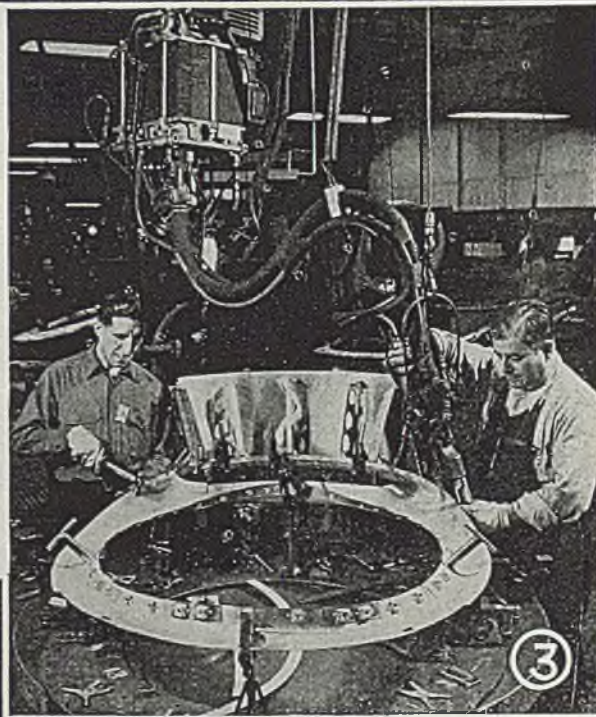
C-type welding gun with cables to overhead transformer and controls is working on start of cowl assembly here
